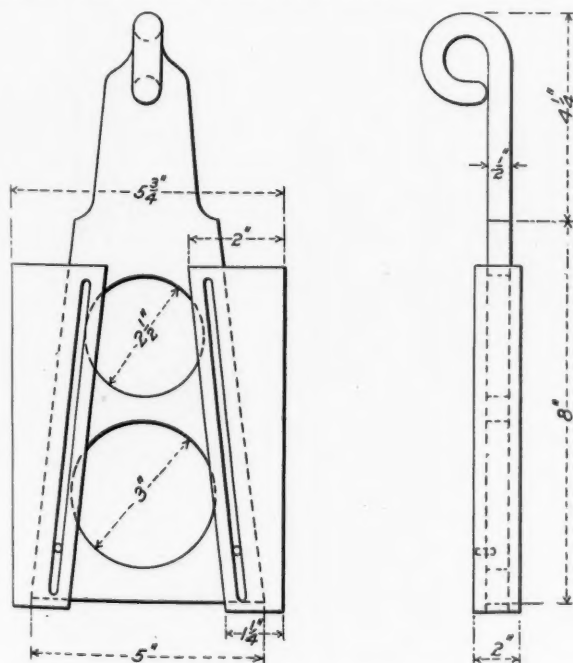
Details of Expanding Wedge Used in Handling Driving Boxes.
